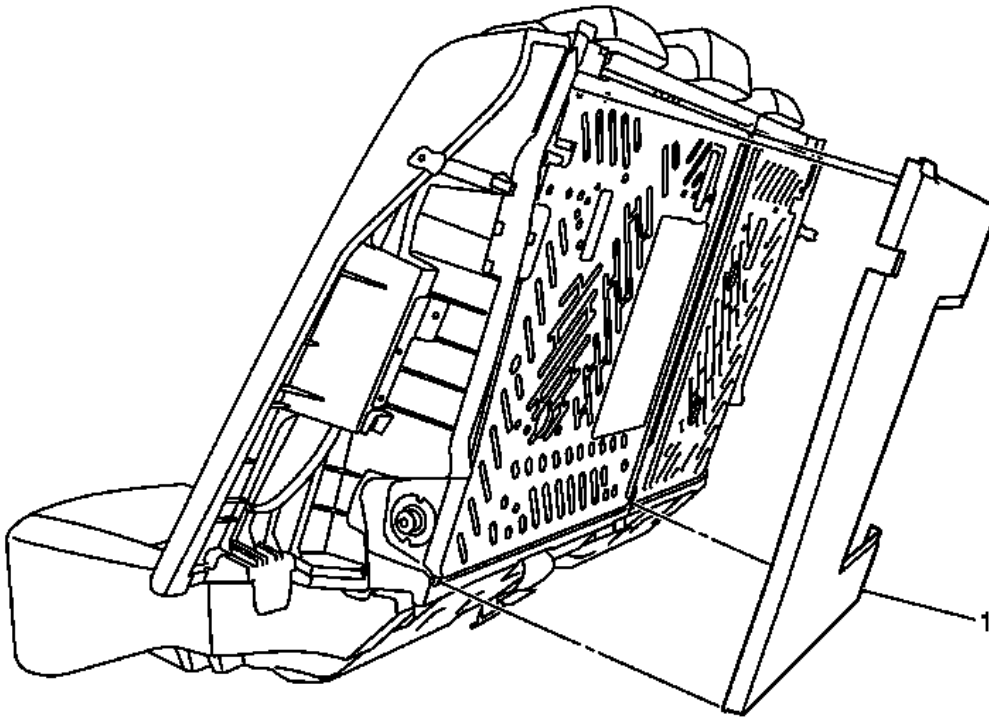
Rear Seat Back Cushion Carpet (60% Side)
